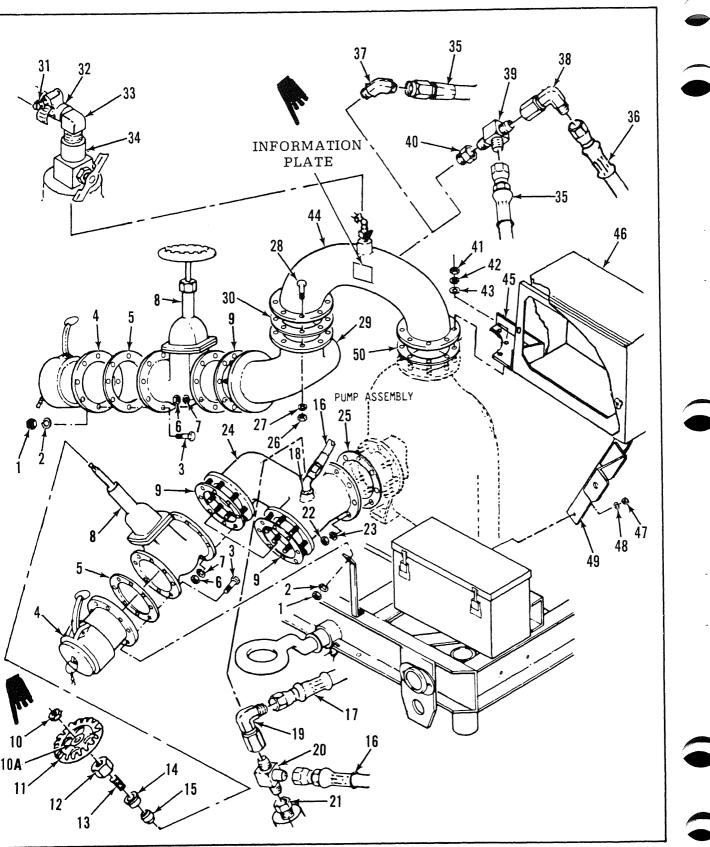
Pump Valves, Manifolds and Fittings, Removal/Installation.
